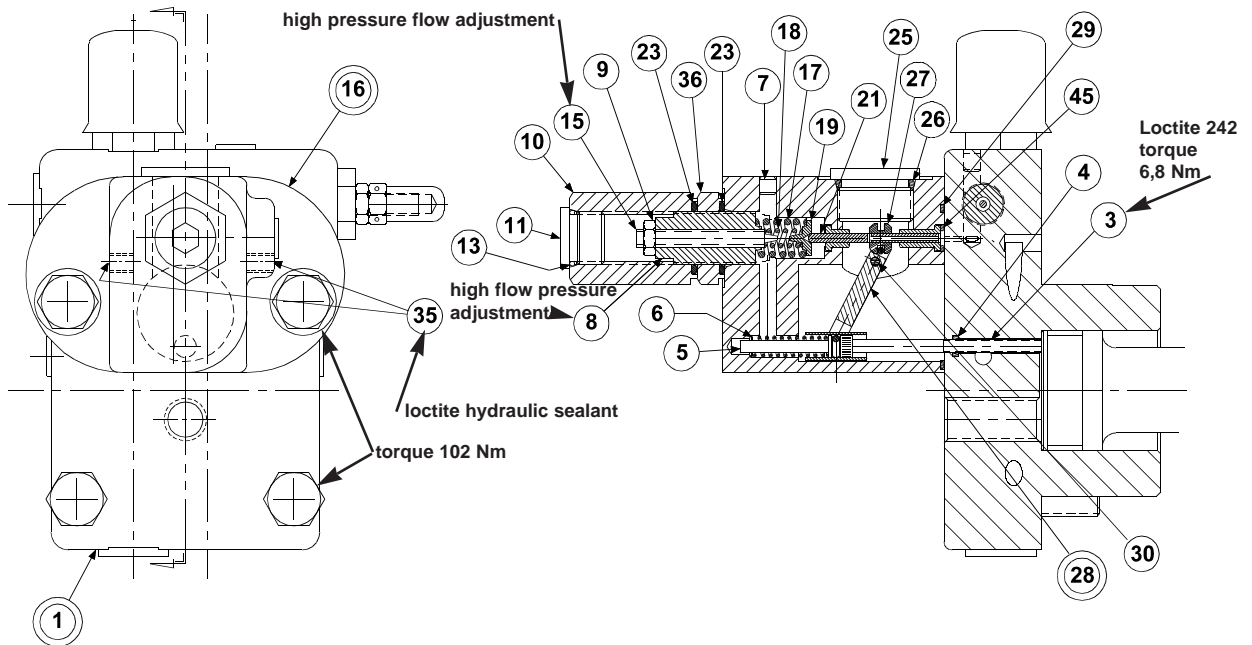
TORQUE LIMITER ASSEMBLY
